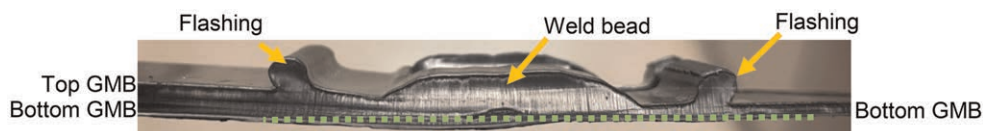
Photographic cross-section view of HDPE extrusion weld.
